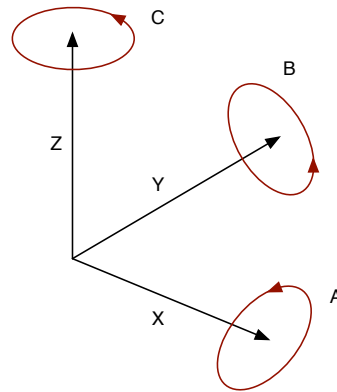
Typical Linear and Rotary Axes on Machine Tools.
